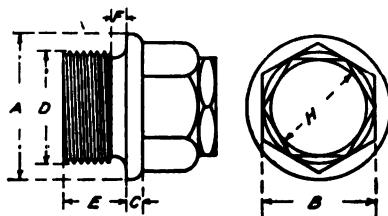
Design and Dimensions of Standard Spark-Plug. Association of Licensed Automobile Manufacturers.
